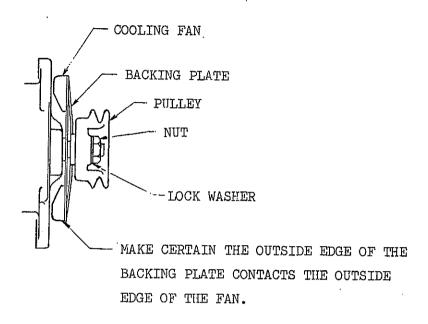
DETAILS FOR COOLING FAN INSTALLATION
